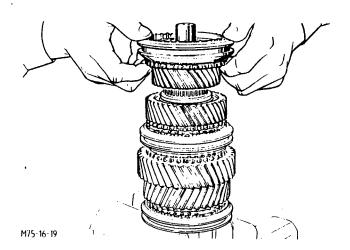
Remove 3rd/4th gear synchronizer unit complete with 3rd gear cog.
